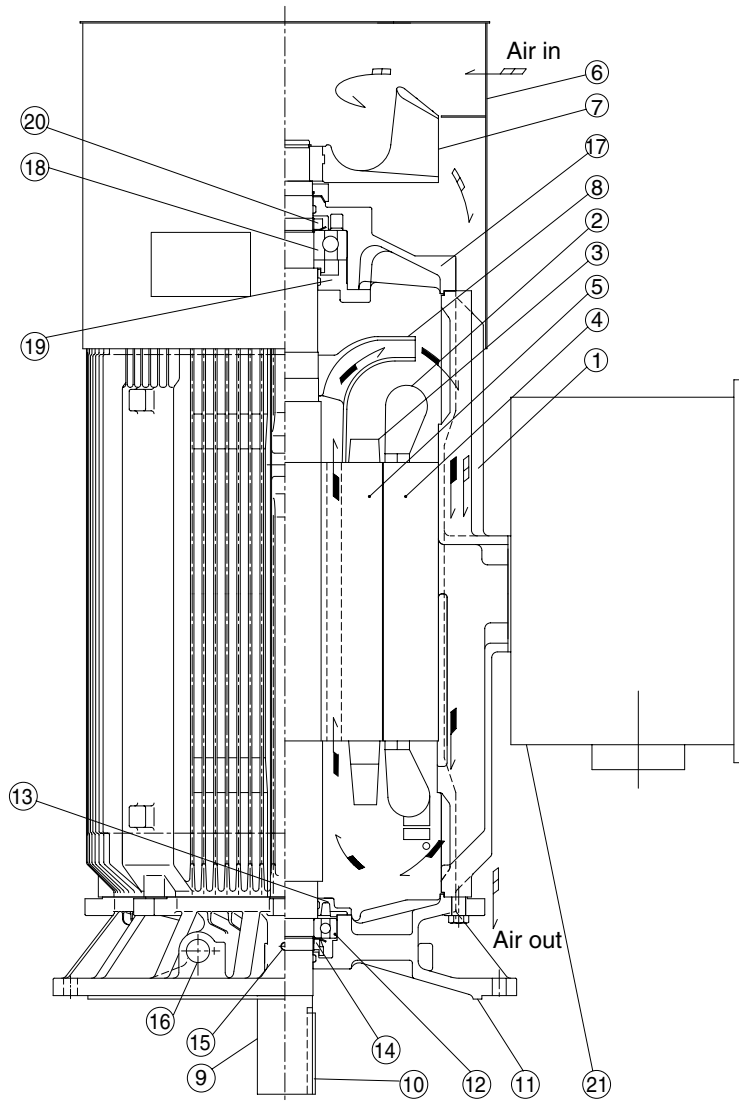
Section Drawing of Vertical flange mount (Frame size 315)
